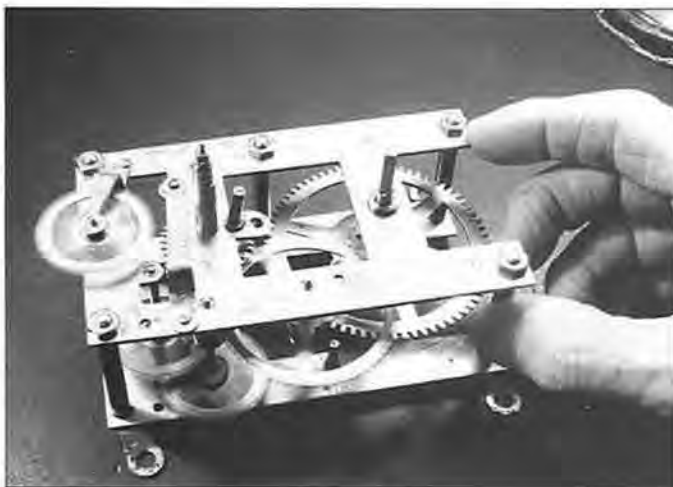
Spin-test the movement in several positions. With no mainspring, a fingernail on the great wheel spins the train easily.
